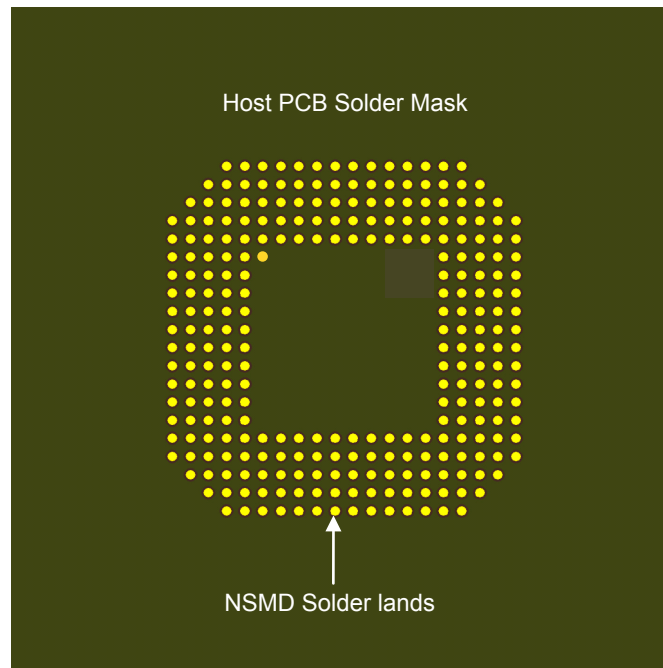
, $\varnothing 0.63$ mm NSMD solder lands, SMO $\varnothing \geq 0.73$ mm
